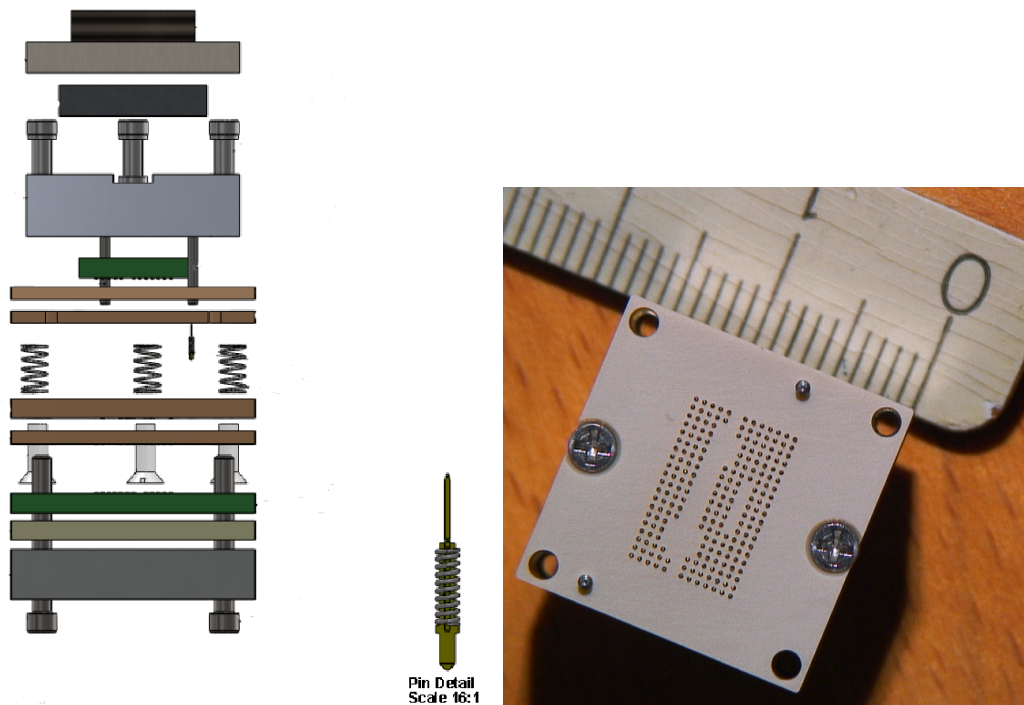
Exploded view of the Test Socket and a photo of the delivered Test Socket showing the BGA-pattern of holes for the probes pins. A probe pin is shown to the left of the photo
